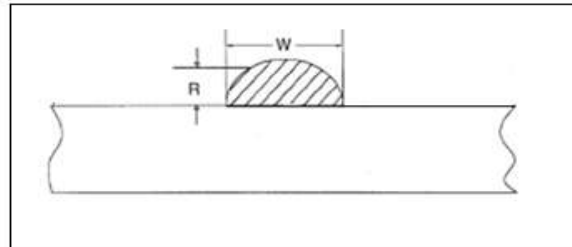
Cross-Sectional of weld bead, where W be weld width in mm, R be the Reinforcement in mm.
